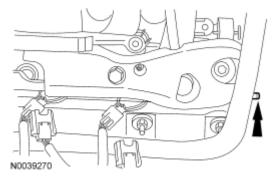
Stud Bolt Courtesy of FORD MOTOR CO.
